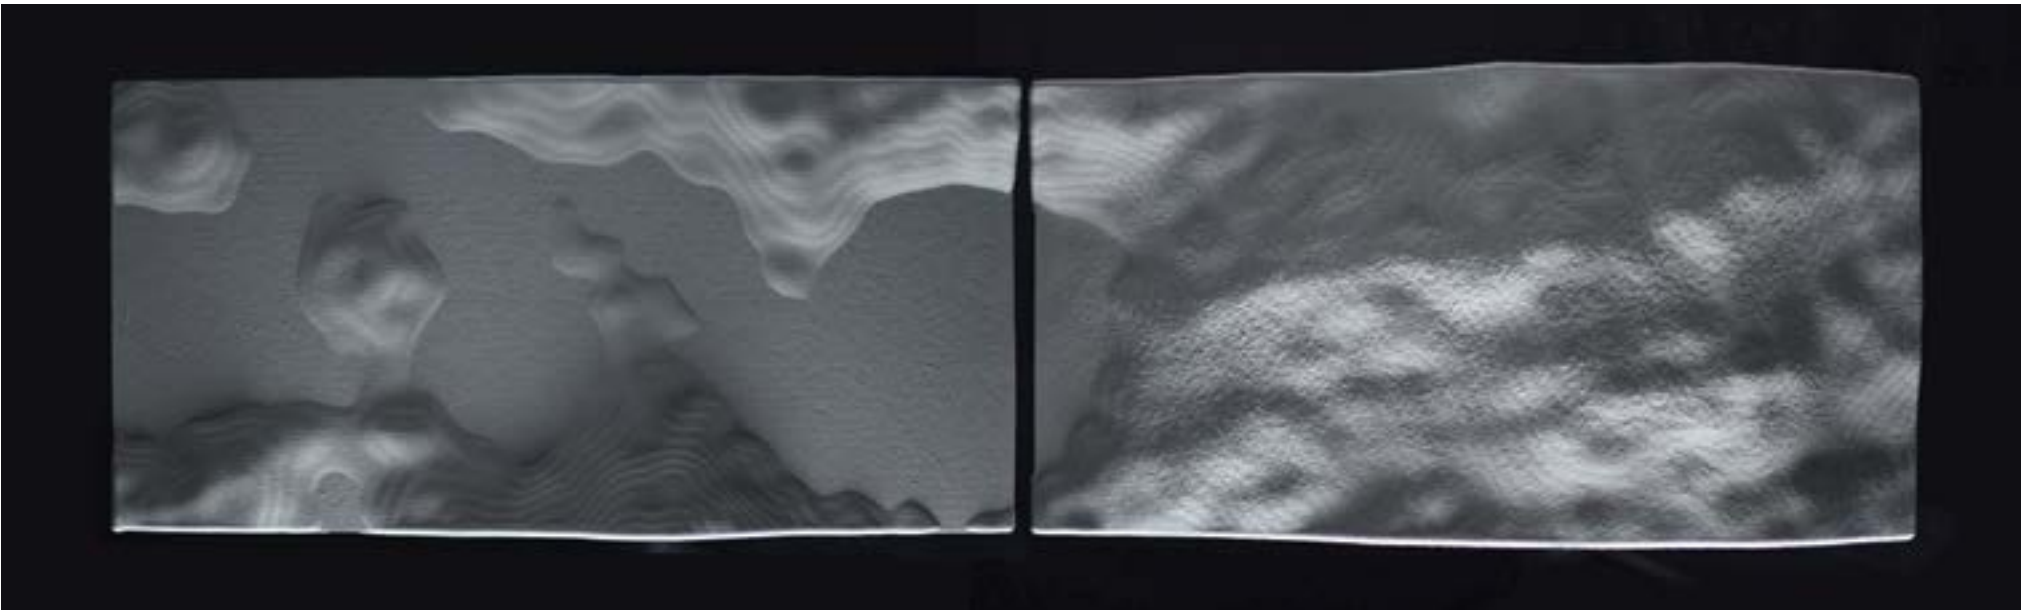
The front and top view of the prototype 180622-DP-TER1 produced using fine CNC-processing (Source: author).
